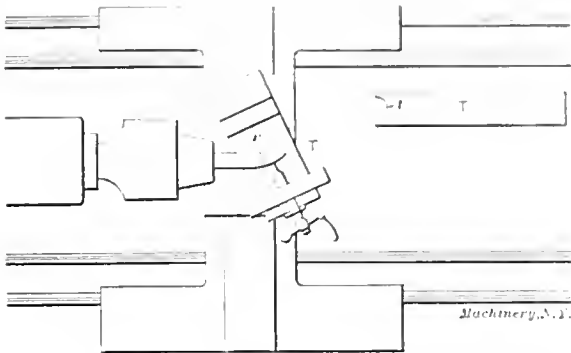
Method of forming the End of Mandrel A in Fig. 2
